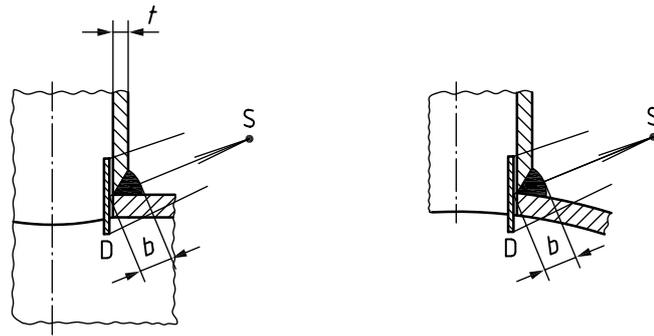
Arrangement for testing of set-on welds with the radiation source outside and the detector inside
